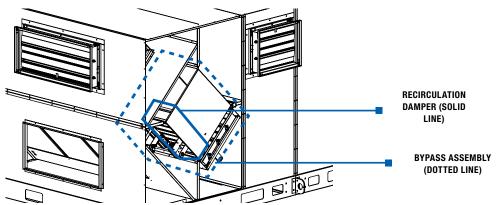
RECIRCULATION DAMPER INSIDE BYPASS ASSEMBLY
